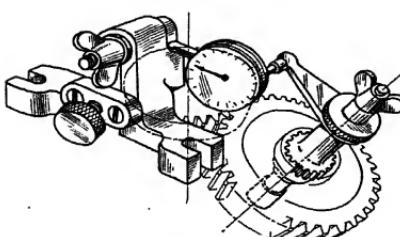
Testing backlash in gears *G* in Fig. 22.
